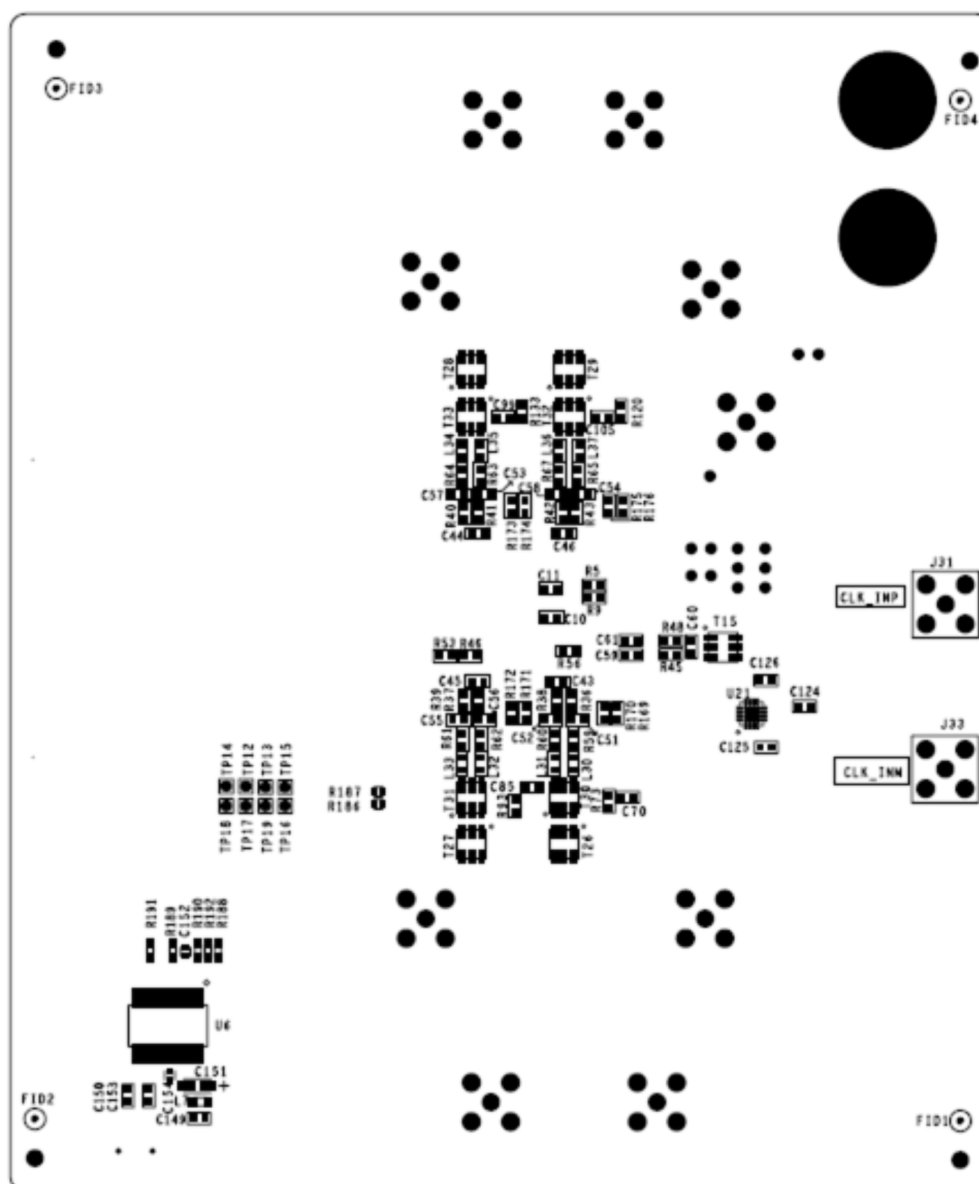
ADS5263EVM Bottom Layer Assembly Drawing – Bottom View
